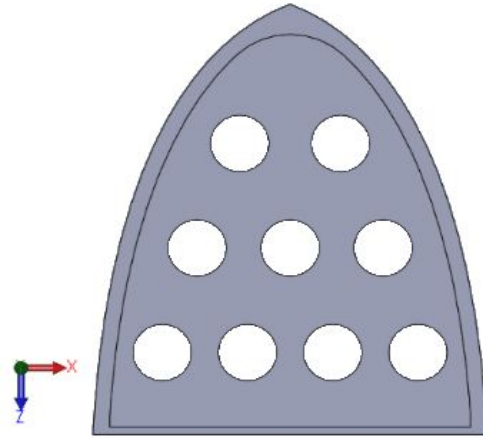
Magnet Inset Pattern. The shape of the mold for the magnetic prototype as well as the pattern of magnet placement to be embedded within the tongue.
